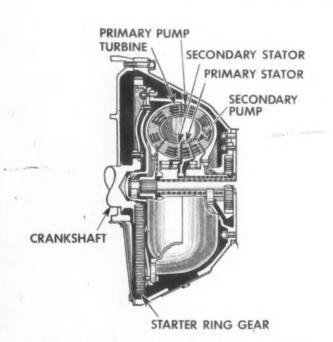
Cut-away drawing of the Dynaflow torque converter.
